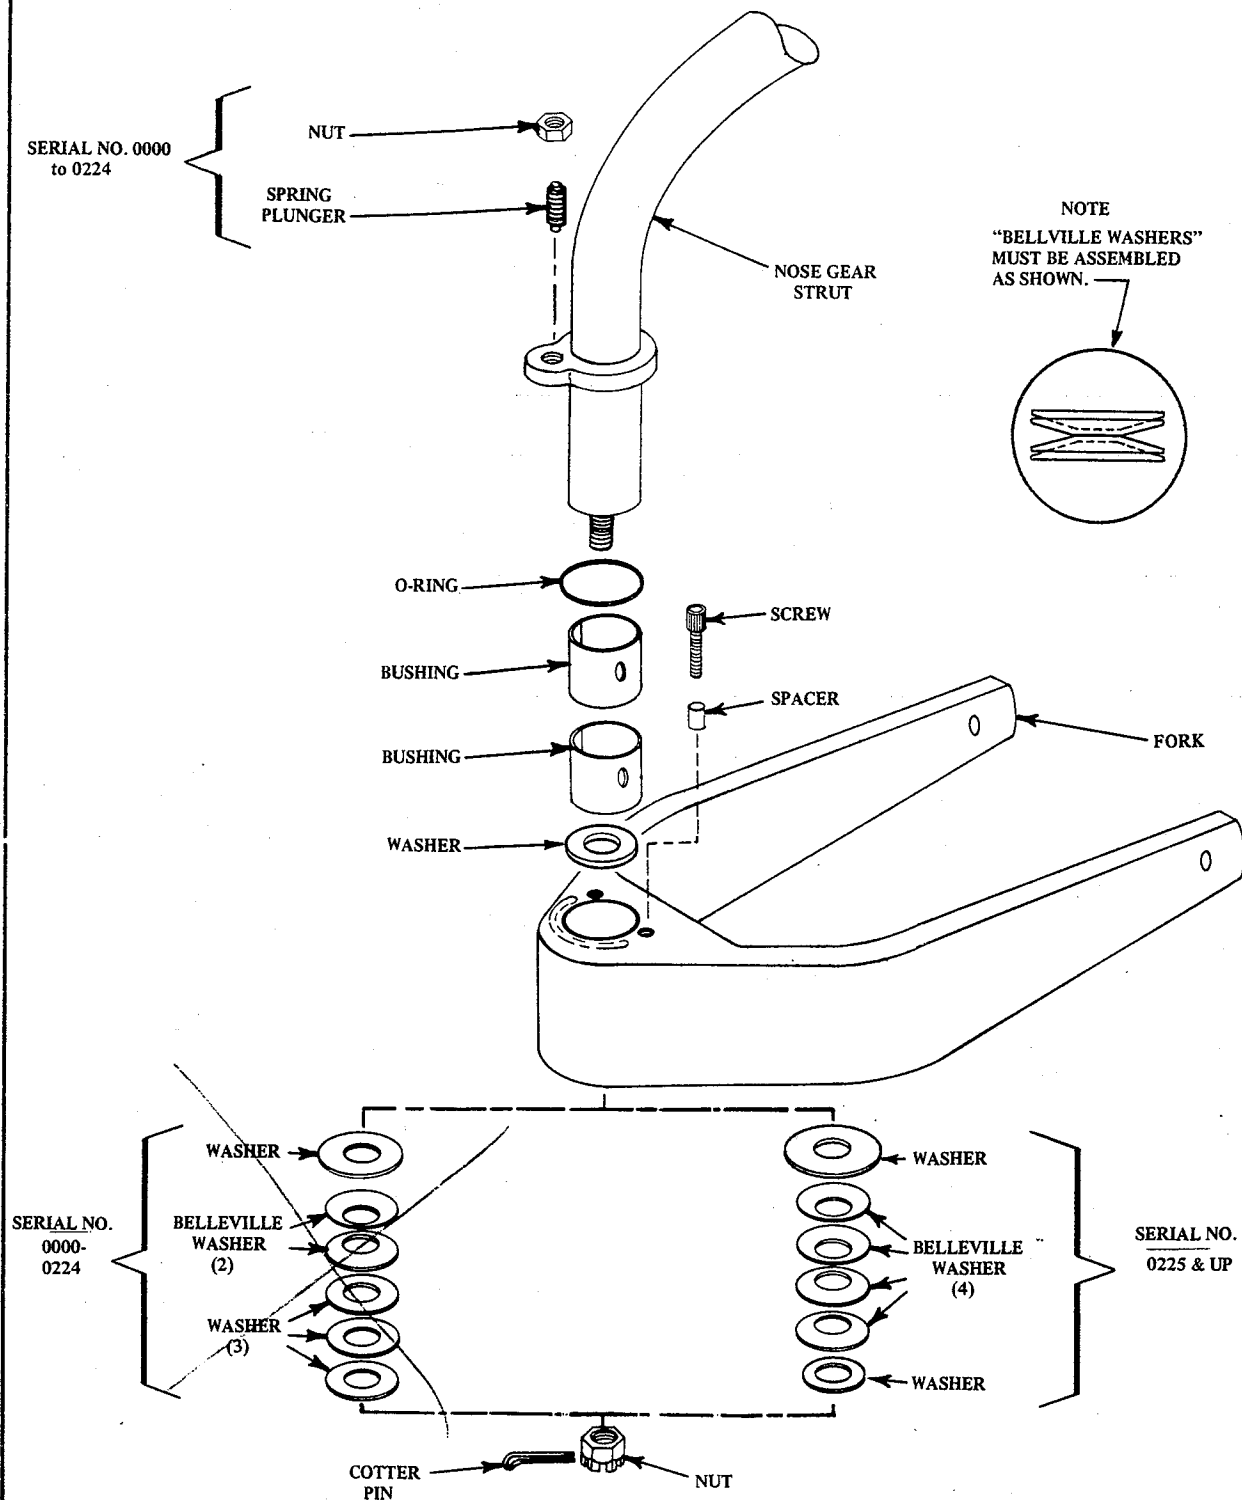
NOSE LANDING GEAR ASSEMBLY
